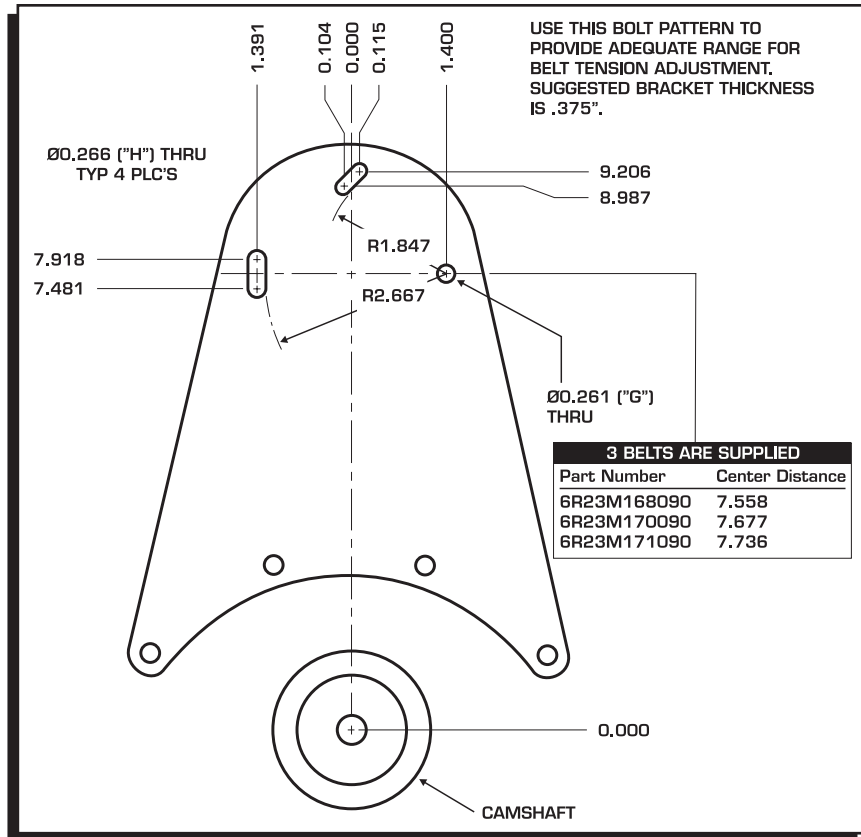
Front Drive Mount Bolt Pattern Dimensions.
